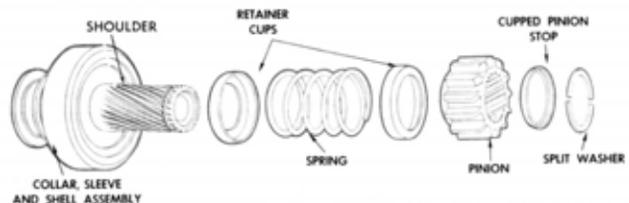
Disassembled view of early type heavy duty sprag clutch drive assembly.
